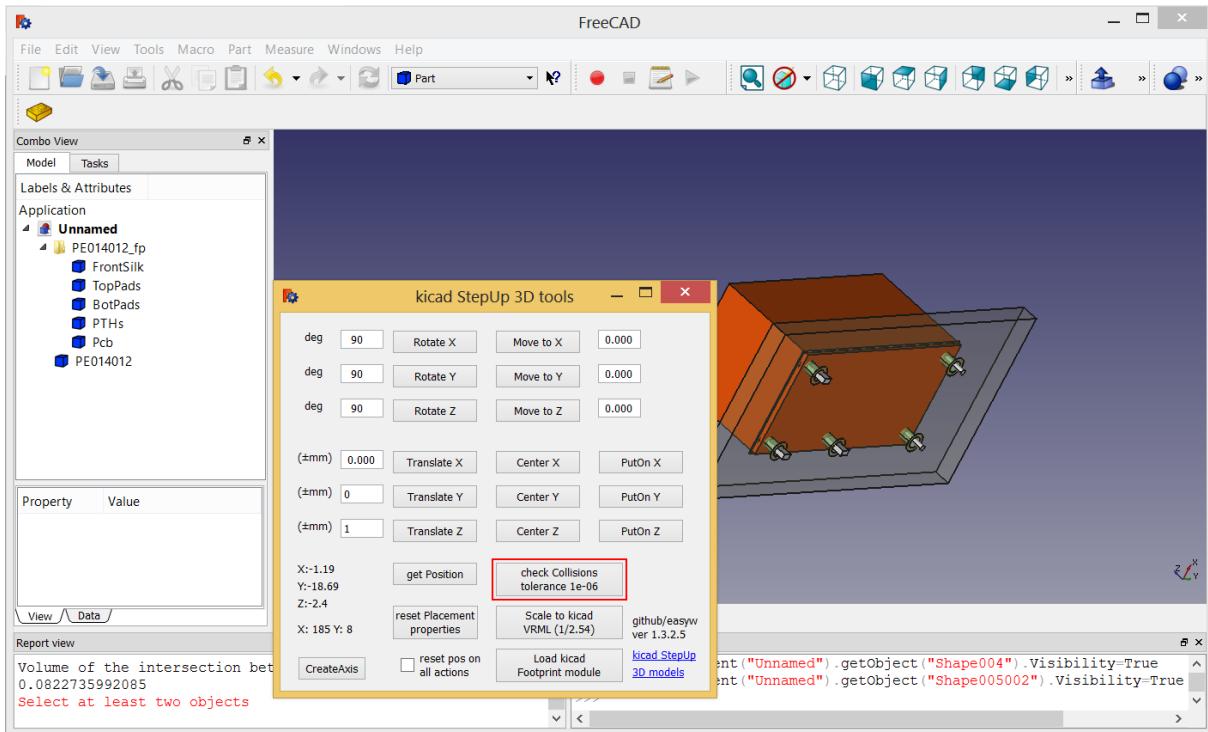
kicad StepUp tools: collisions check for 3D part module and footprint
